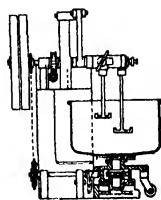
C is a kneading machine recently introduced in Germany in which a pair of arms are moved in elliptical paths towards one another in a rotating pan. A clutch is provided in the pan driving gear which is thrown out of engagement on the mixture becoming stiff, when the pan rotates in the opposite direction owing to the movement of the mixture. The pan is rotated by a worm gear from a shaft, on which the clutch is fitted. This clutch comprises a member splined to the shaft and provided with inclined teeth engaging a mating member fixed to the shaft. On the resistance to rotation increasing owing to the stiffening of the mixture, the inclination of the teeth effects the disengagement of the clutch. Re-engagement is effected by means of a foot lever. The kneading arms are arranged on either side of the axis of the pan and pass one another in their orbits.
